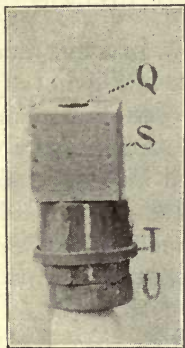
COMPARATIVE FUSION TEST MOLD.
